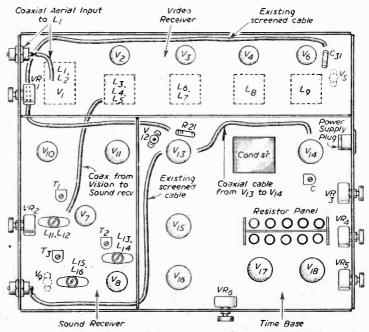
(above),—Top of chassis layout, and Fig. 4 (below)—Underneath view of the chassis.
